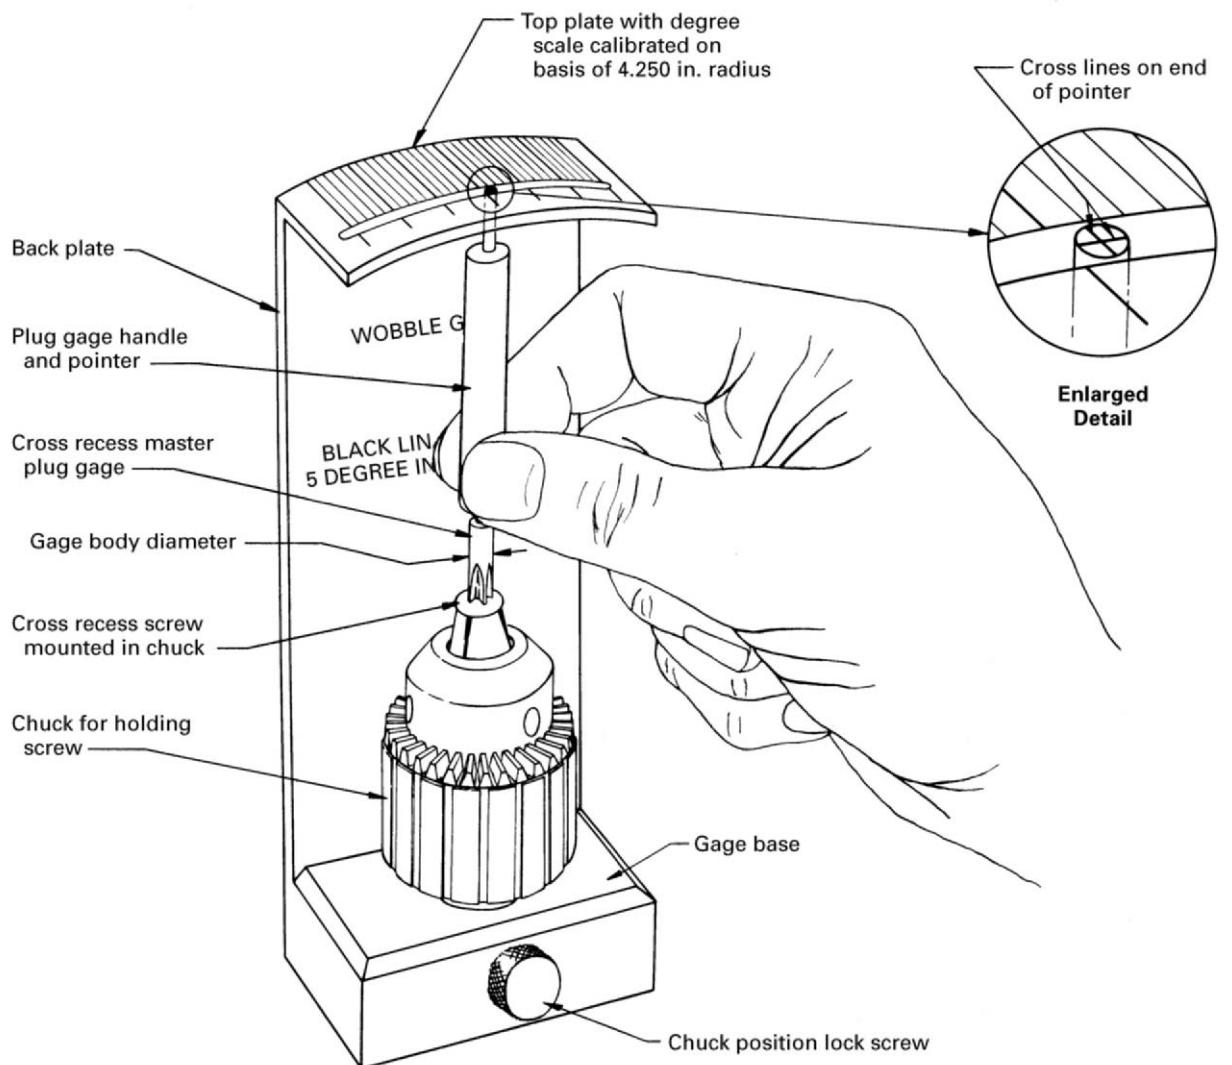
TYPICAL WOBBLE GAGING FIXTURE
